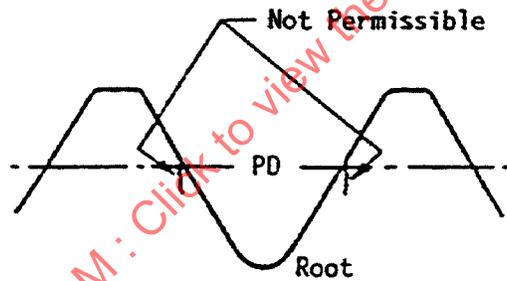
Laps Below PD Extending Toward Root, Rolled Thread
